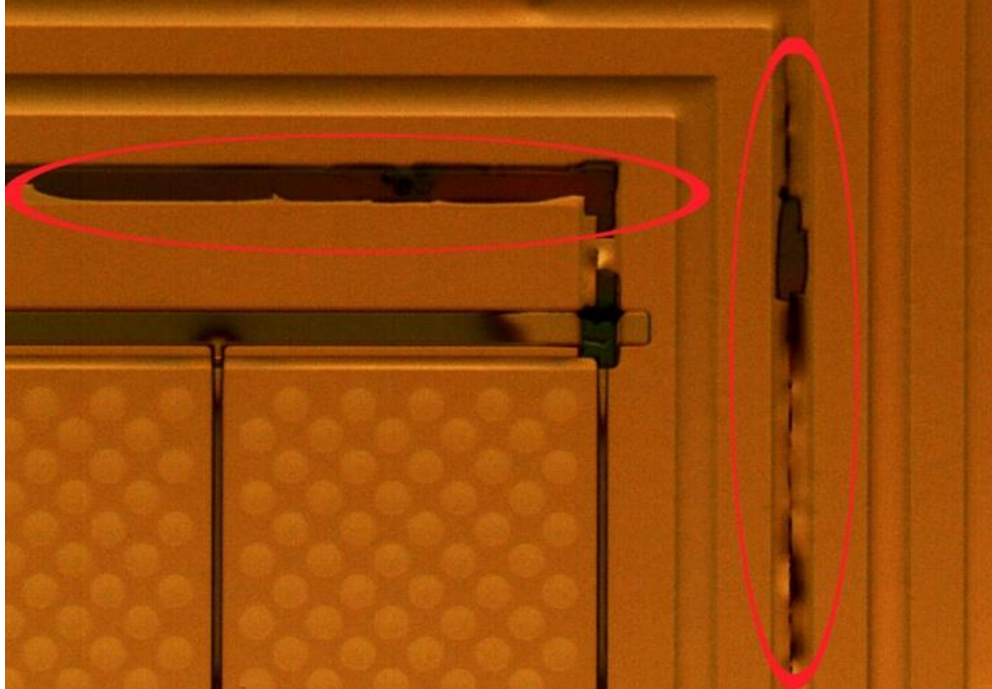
Membrane damages occurring at wide trenches using the Vertical-only design.
